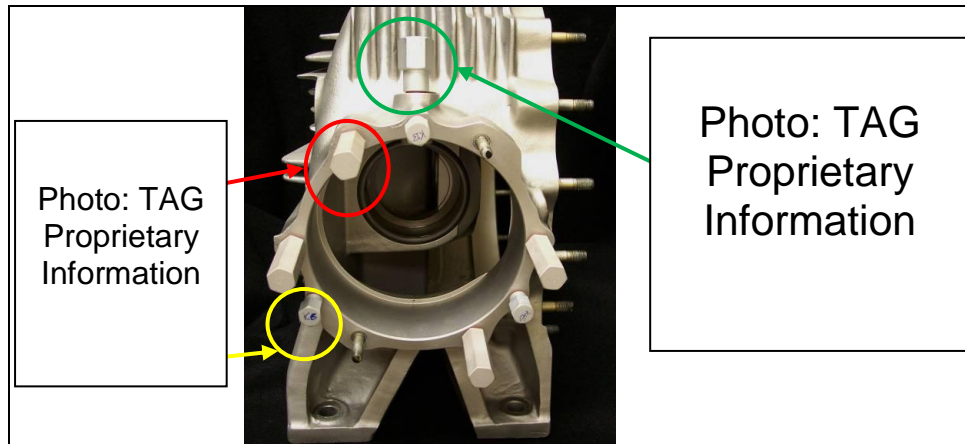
Masking of studs, helicoils, and inserts on tail rotor gearbox housing: stud covers (red), helicoil covers (yellow), and insert cover (green).
